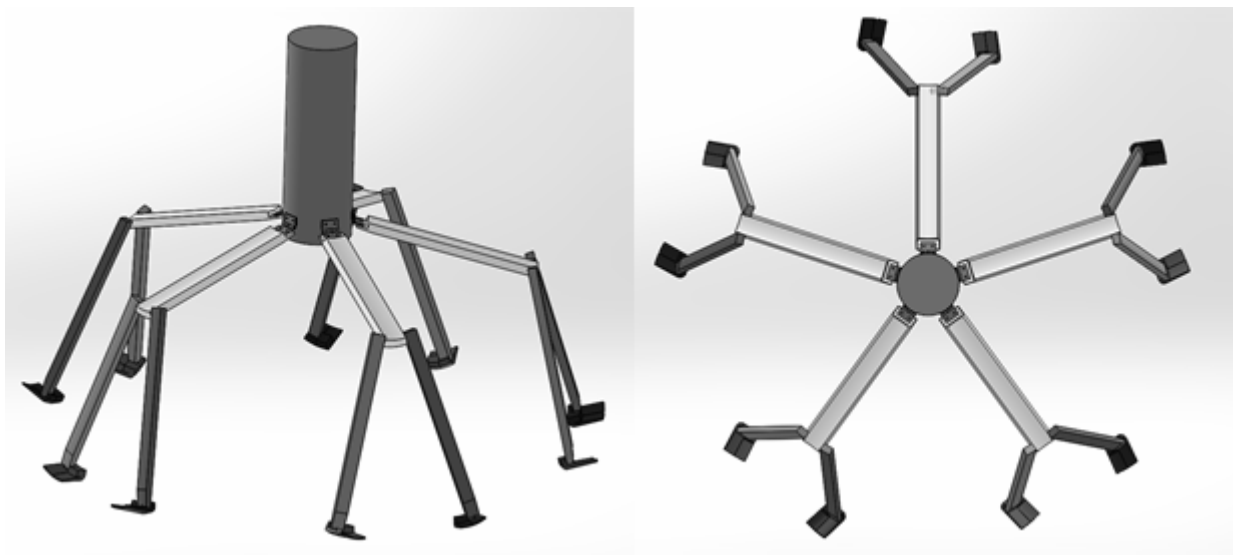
Top and Trimetric Model-View of the Assembled Payload.
